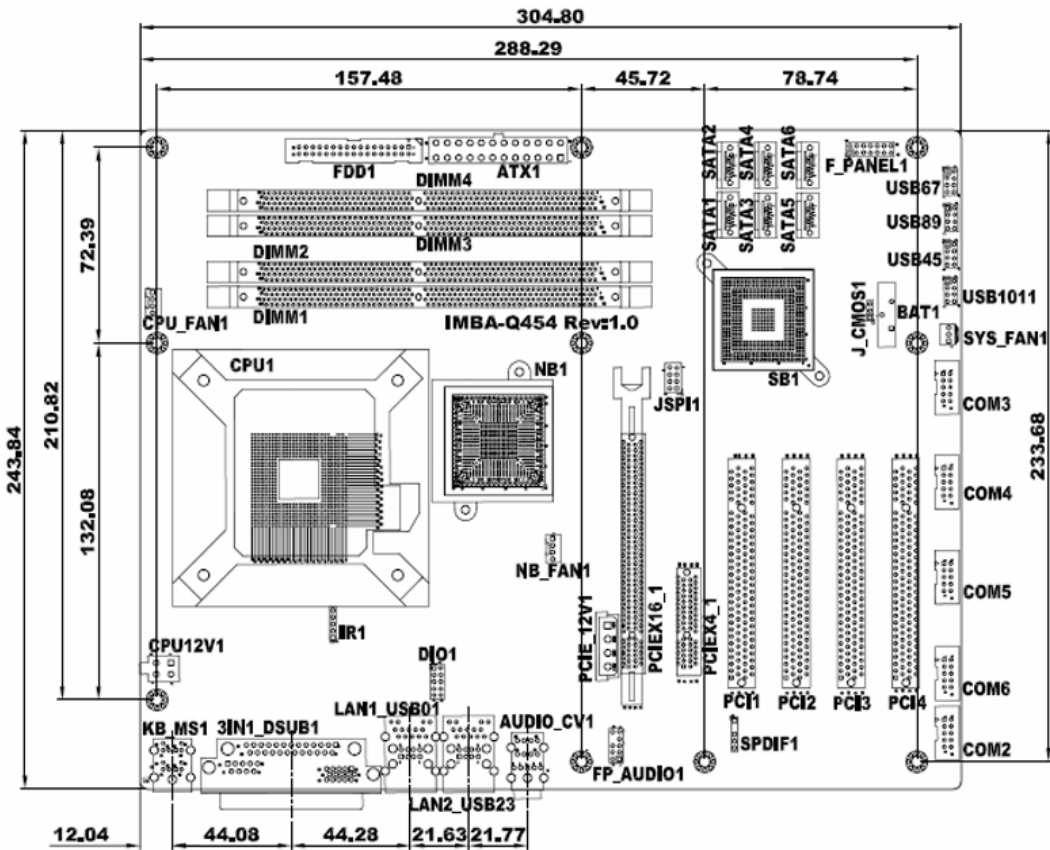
IMBA-Q454-R10 Dimensions (mm)
